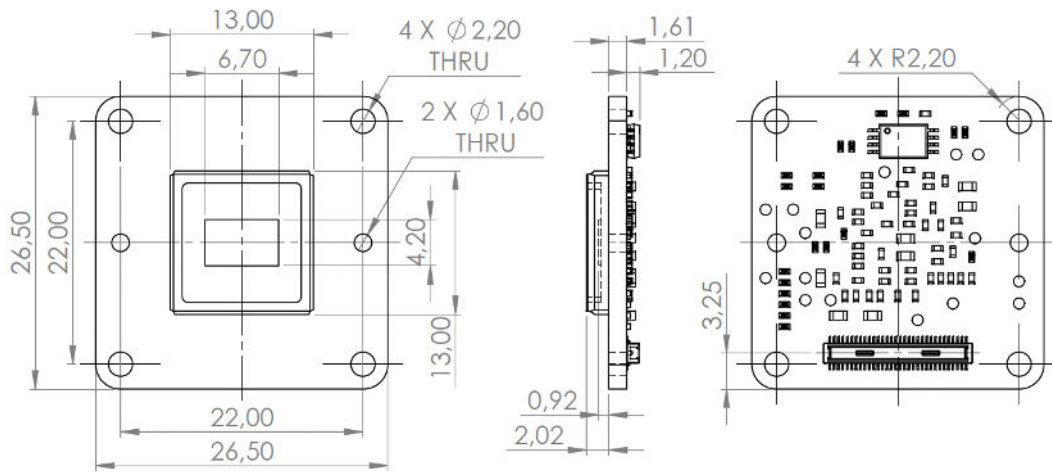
Mechanical drawing: FRAMOS Sensor Module (FSM) of the FSM-IMX636 Devkit
